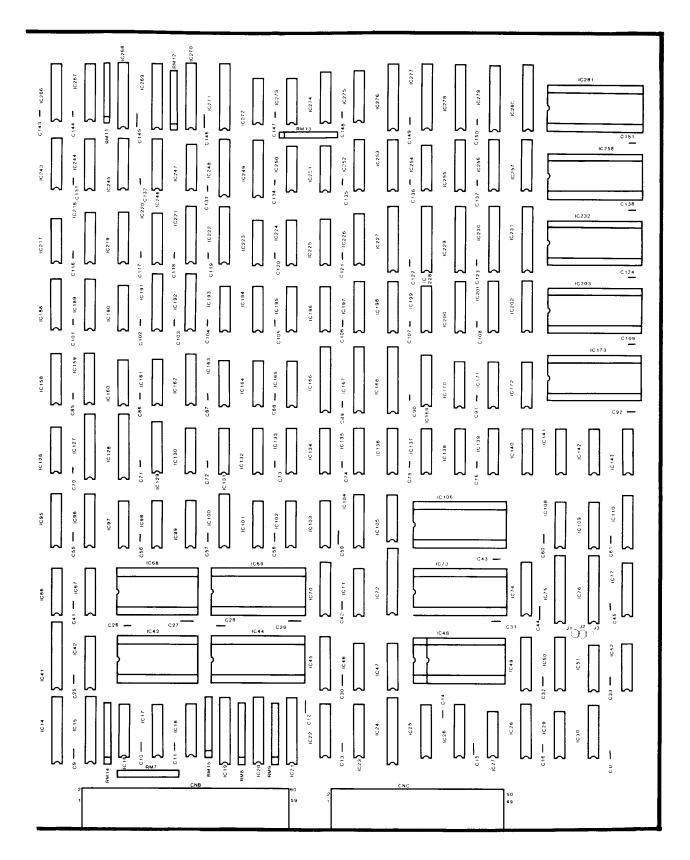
TX-1 Graphics PCB Assembly, continued A042019-21 A
